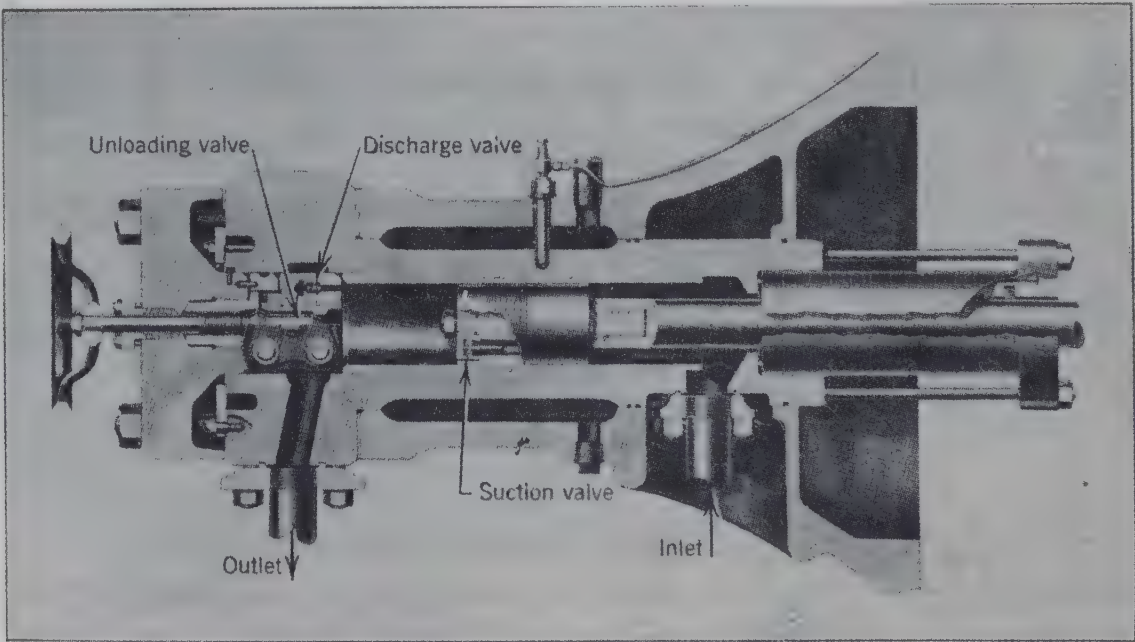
Cutaway view of compressor cylinder for pressures up to 6000 psi. (Cooper-Bessemer Corp.)
